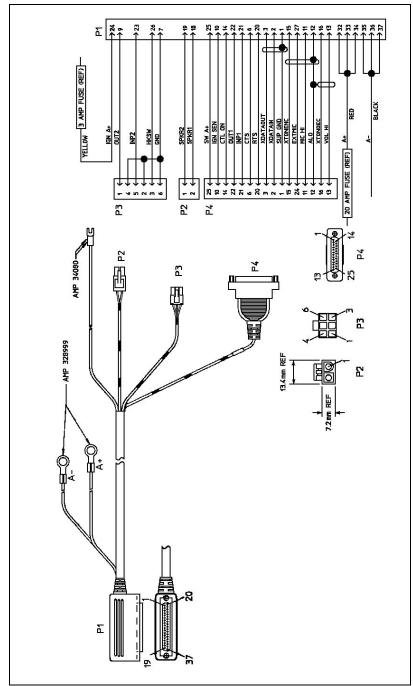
EURO Front Mount Extended Option Accessory Cable 19B802554P12
